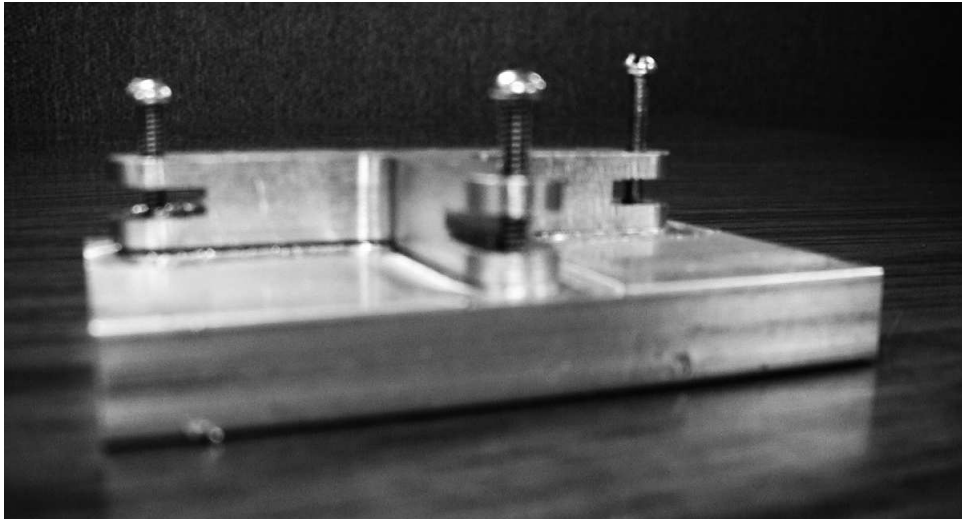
A side view of the T-part when fixtured for CNC machining.
